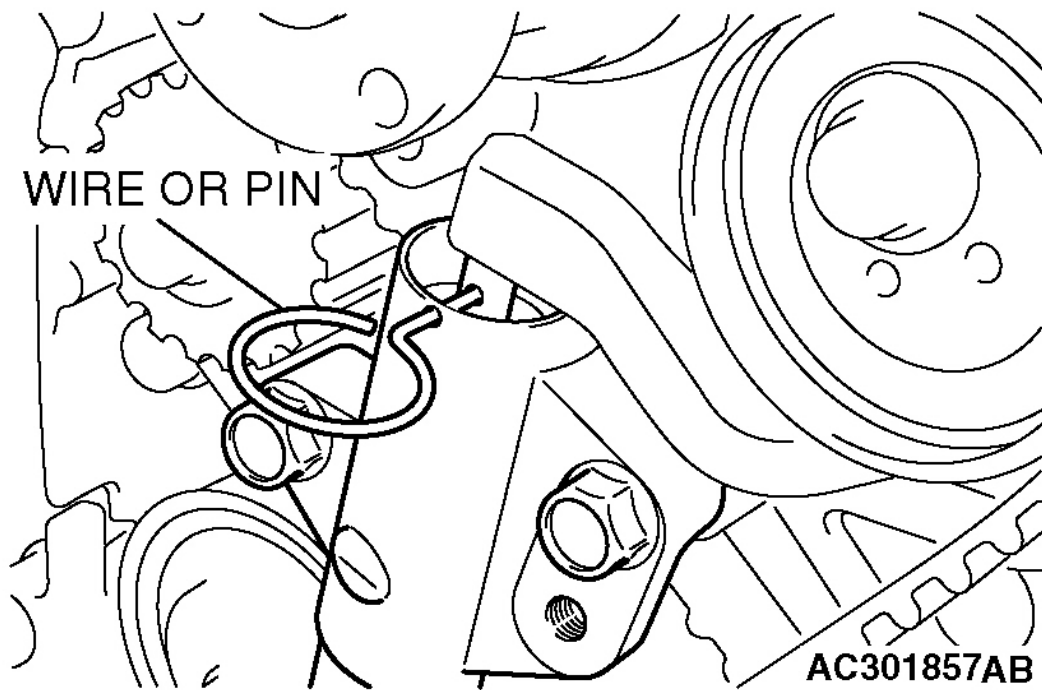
Removing Wire Or Pin Inserted To Timing Belt Tensioner Adjuster
